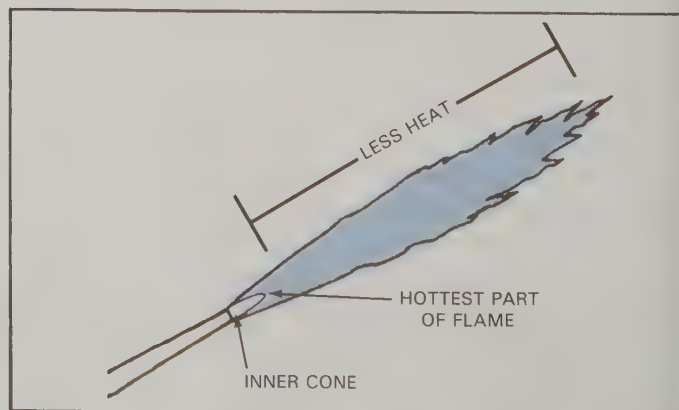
The hottest part of a neutral oxy-acetylene flame is just ahead of the inner cone. Heating of the metal can be controlled by moving the inner cone closer or farther away.
